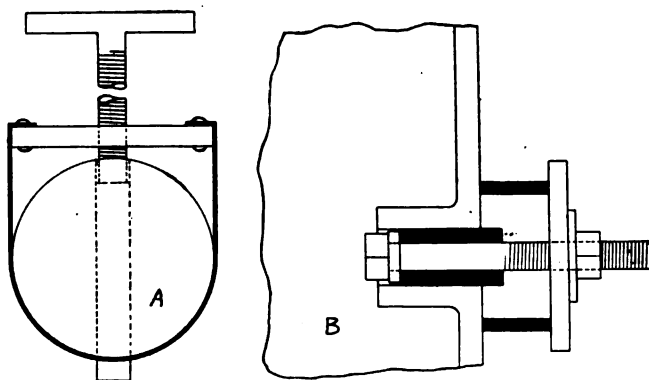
At A, Tool for Removing Wrist Pins; at B, Tool for Removing Wrist Pin Bushings.
